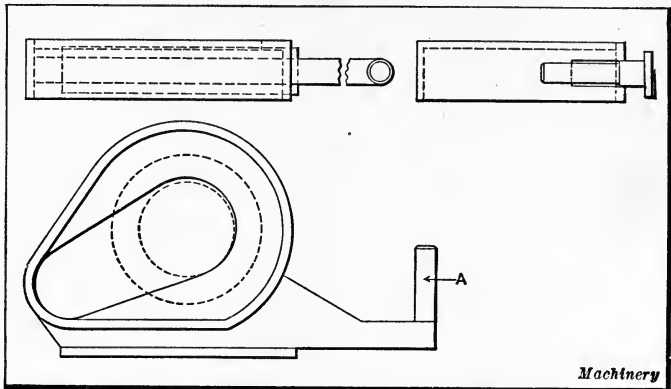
Fixture used to Hold Work while performing Disk-grinding Operation on Double-spindle Machine
